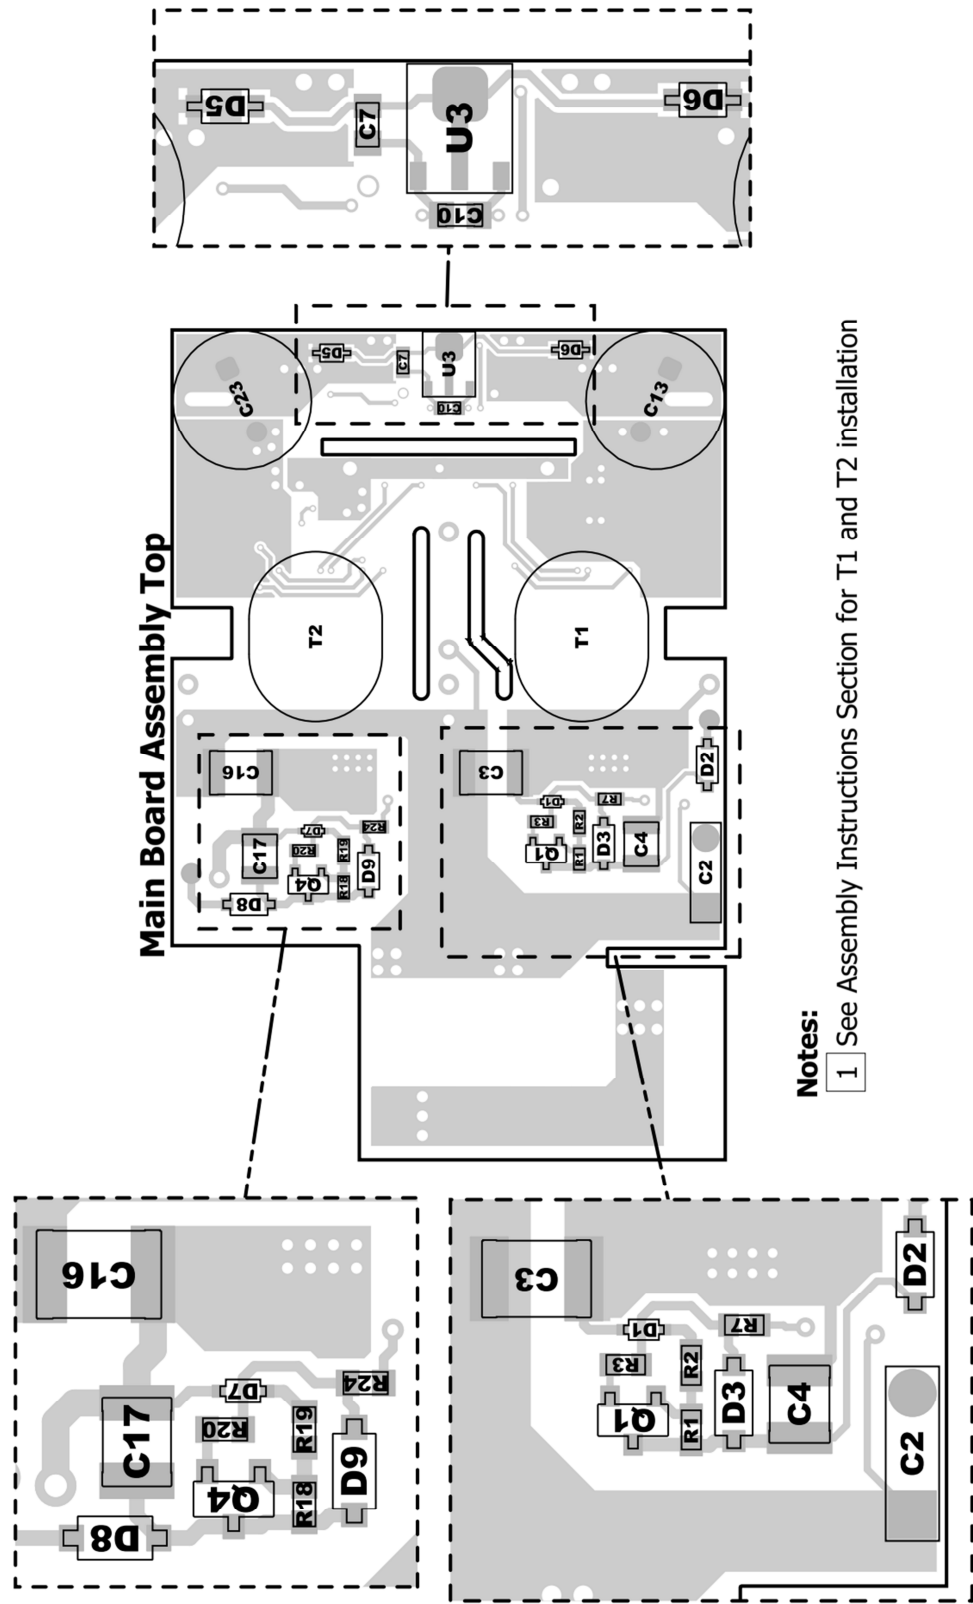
DER-916 Main Board Rev C PCB Assembly Top.
